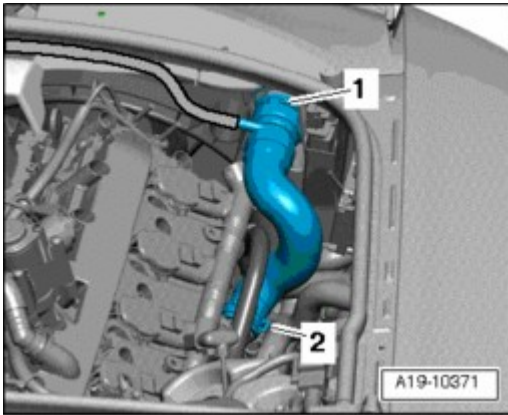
Removing Coolant Hose From Radiator And Right Coolant Pipe
